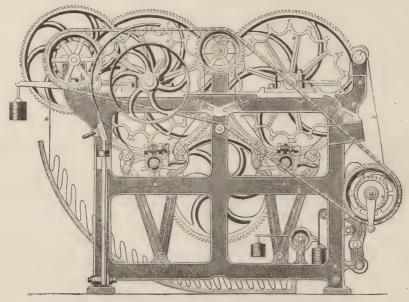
Sectional View of Double Cylinder Rotary Gig.
